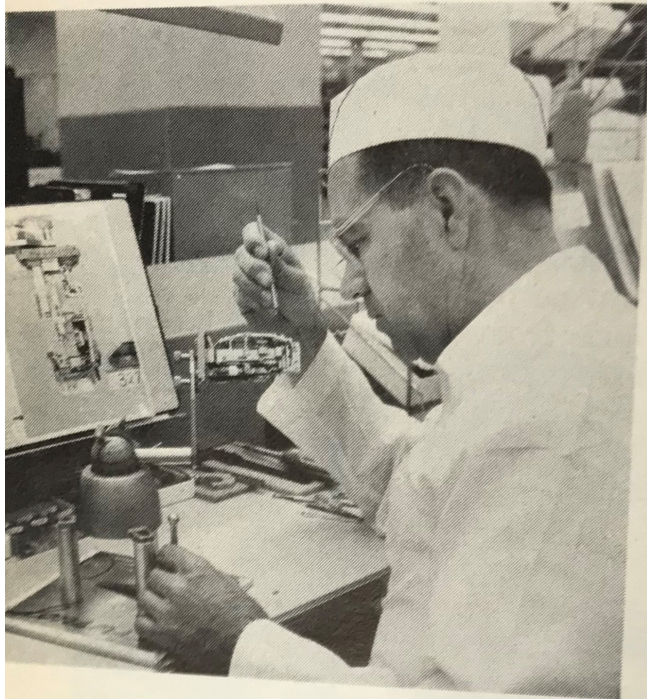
Technician makes final adjustments on assembled force-balance Mach transducer.
